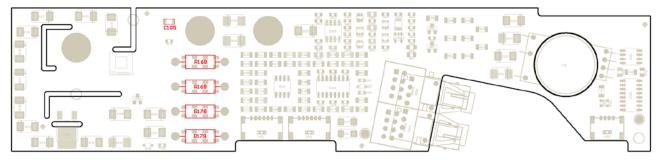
Assembly drawing of 1SP0635x2M1 with highlighted gate resistors
